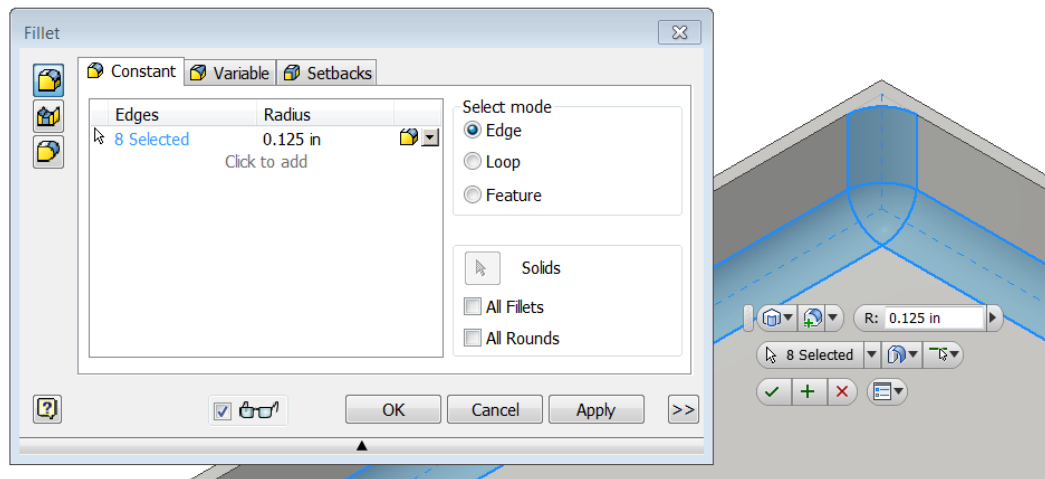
INTERIOR FILLETS AFTER FACE DRAFTS
